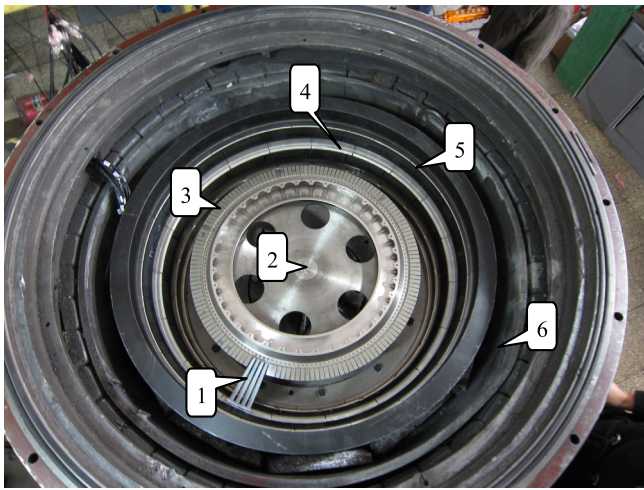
Assembly of the test components for the low-pressure turbine stage. 1–4—bladed sector, 2—mounting disk, 3—balance mass, 4—liner, 5—casing, and 6—testing chamber.
